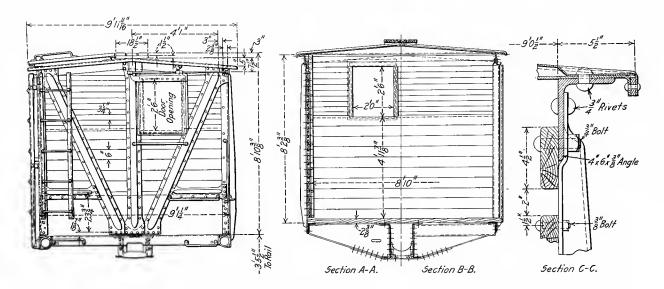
End Elevation and Cross Sections of Pennsylvania Railroad Steel Frame Stock Car Shown in Fig. 363. The Frame and Roof of This Car are the Same as Those Used on the Box Car Shown in Figs. 269-271.
